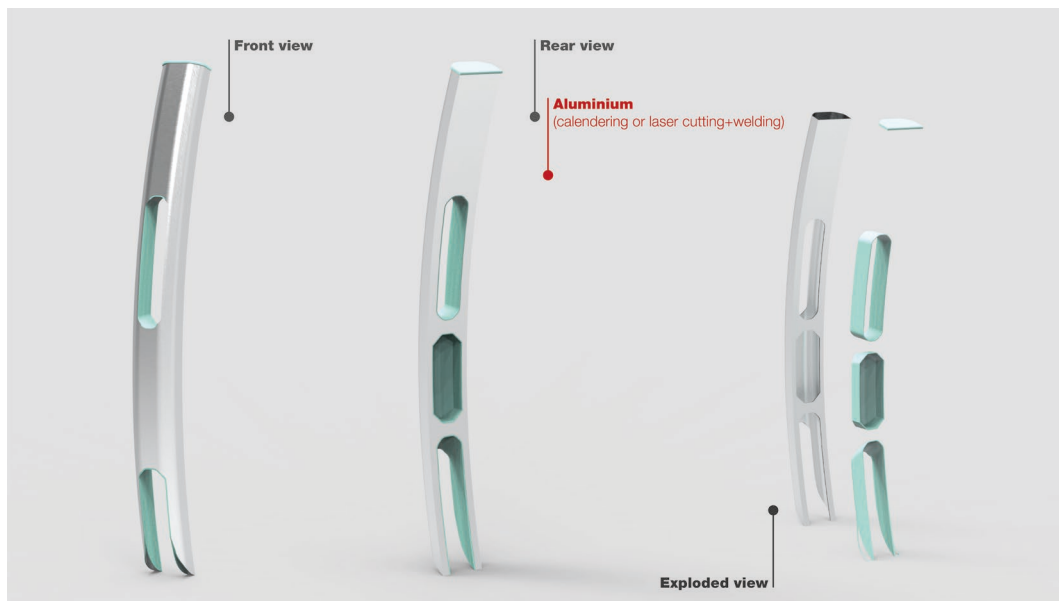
The concept for aluminum calendaring or laser cutting and welding of the steering column.
